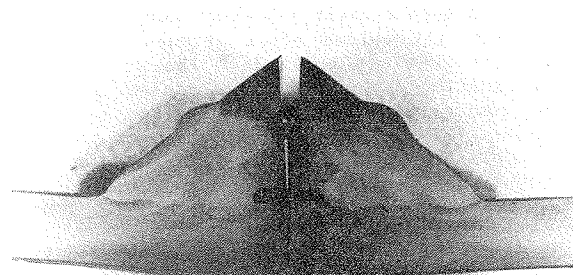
Etched sections of sample core C3C showing insert plate and notches at weld roots.
